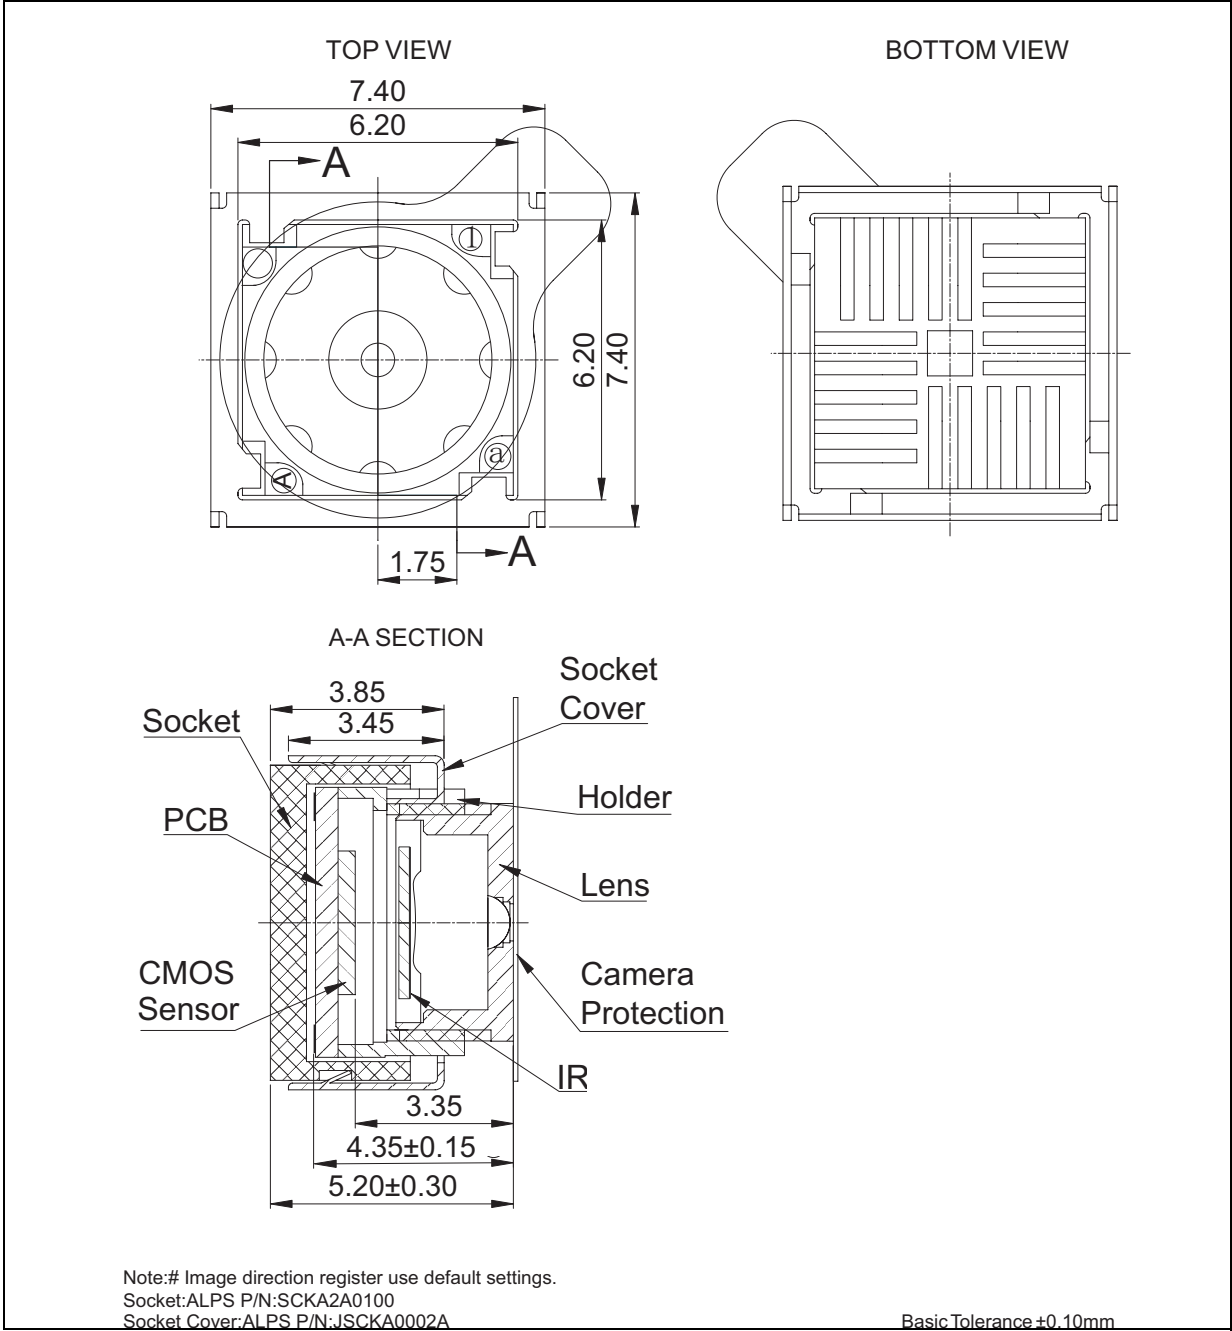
VS6524Q06J socket assembly outline drawing for information only
